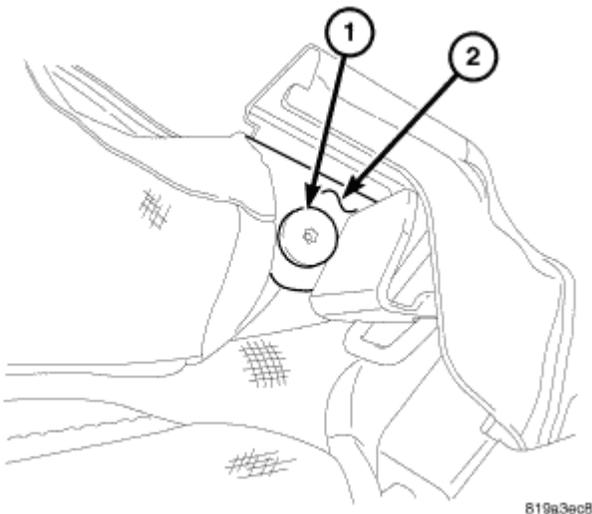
Removing/Installing Seat Bolt From Floor Bracket
